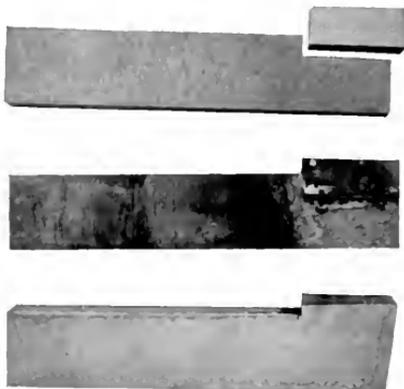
Electrically Butt-welding High Speed Cutting Face to Machine Tool Shank
